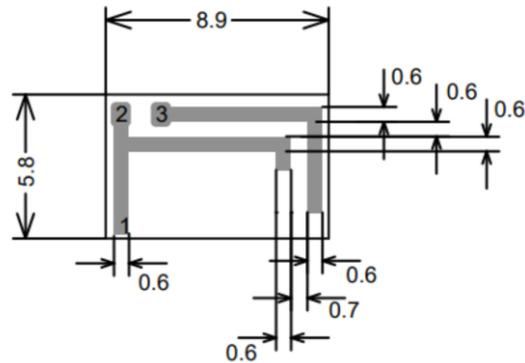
Footprint of the AC10300-01 on the top PCB layer. All dimensions are given in mm
